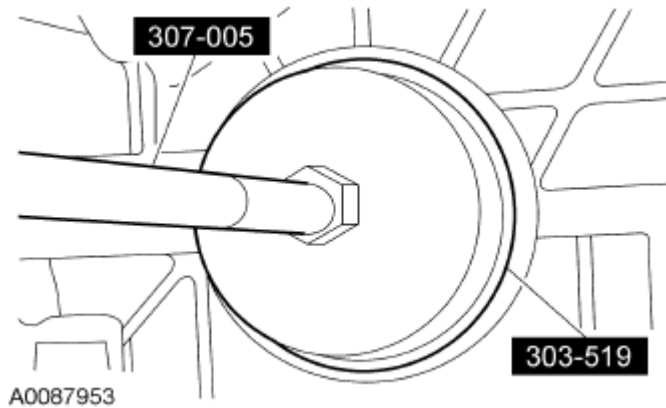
Removing Discard Crankshaft Rear Oil Seal
